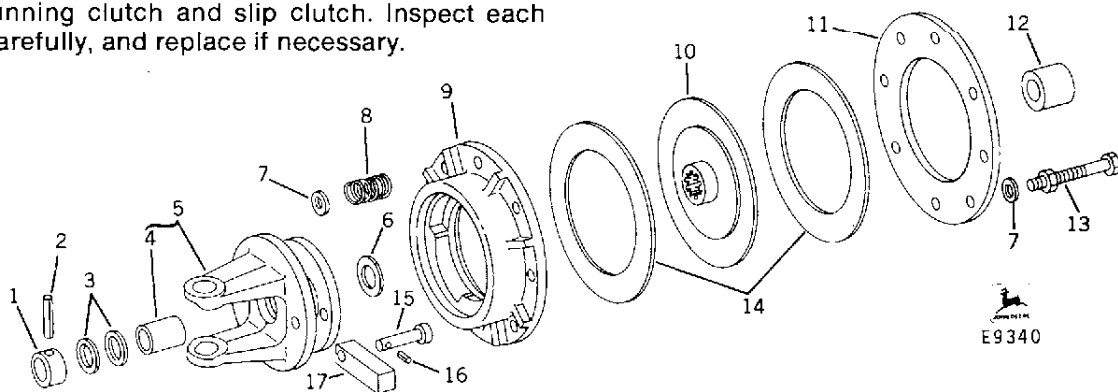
Removing Overrunning Clutch and Slip Clutch
